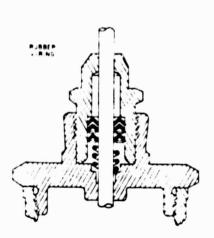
V5011A & C Screwed Pattern - 150 psi. Packing Shown.
